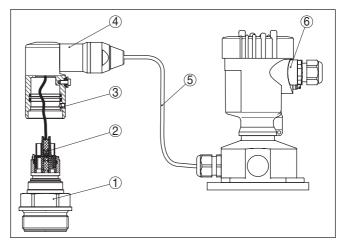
VEGABAR 83 in IP 68 version, 25 bar and lateral cable outlet, external housing
